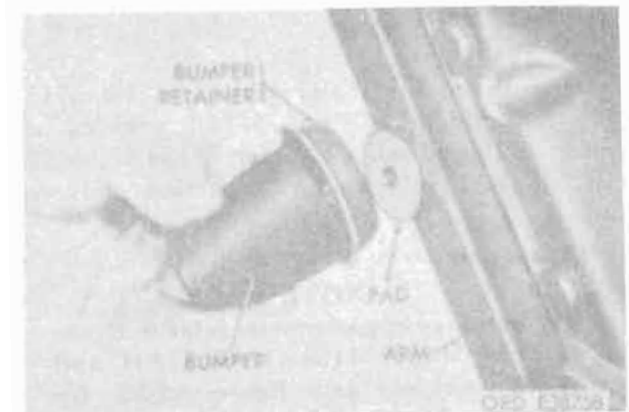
Suspension arm bumper and pad (M151, M151A1, M151A1C and M718 vehicles).
